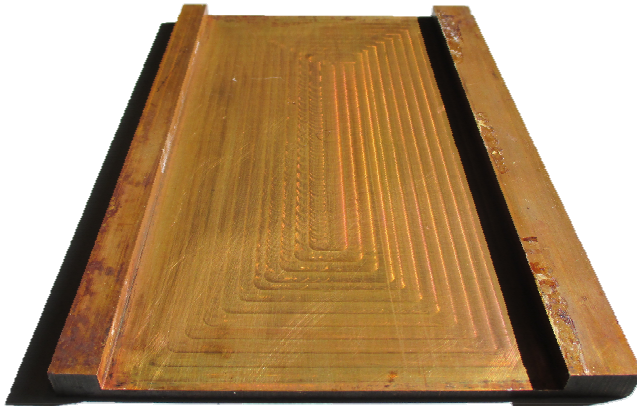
Photograph of the channel mould with upright edges on the left- and right-hand side. A top plate is used that just fits between these edges.
